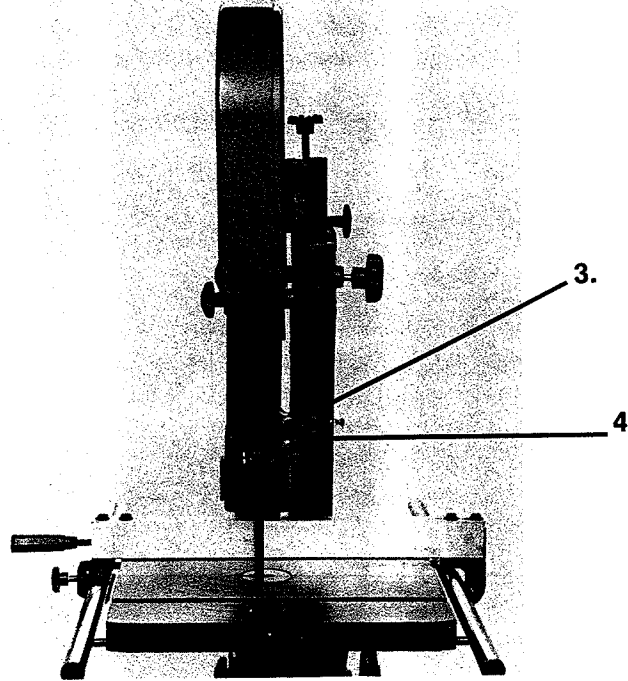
Shows adjustment knob locations for raising and lowering guide assembly.
